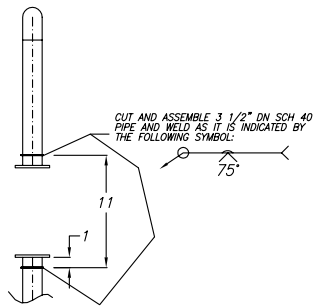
UNIT ASSEMBLY FOR MODELS 12F1 THRU 14F3
